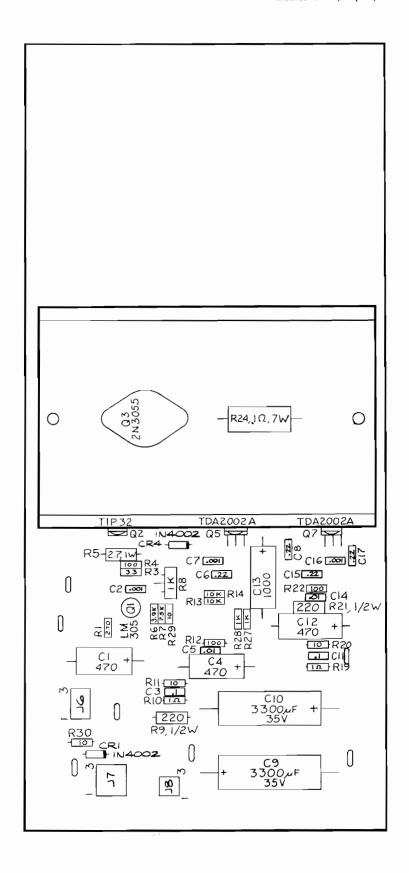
Regulator/Audio II PCB Assembly U.S.-Built Cabinet A035435-01 G
